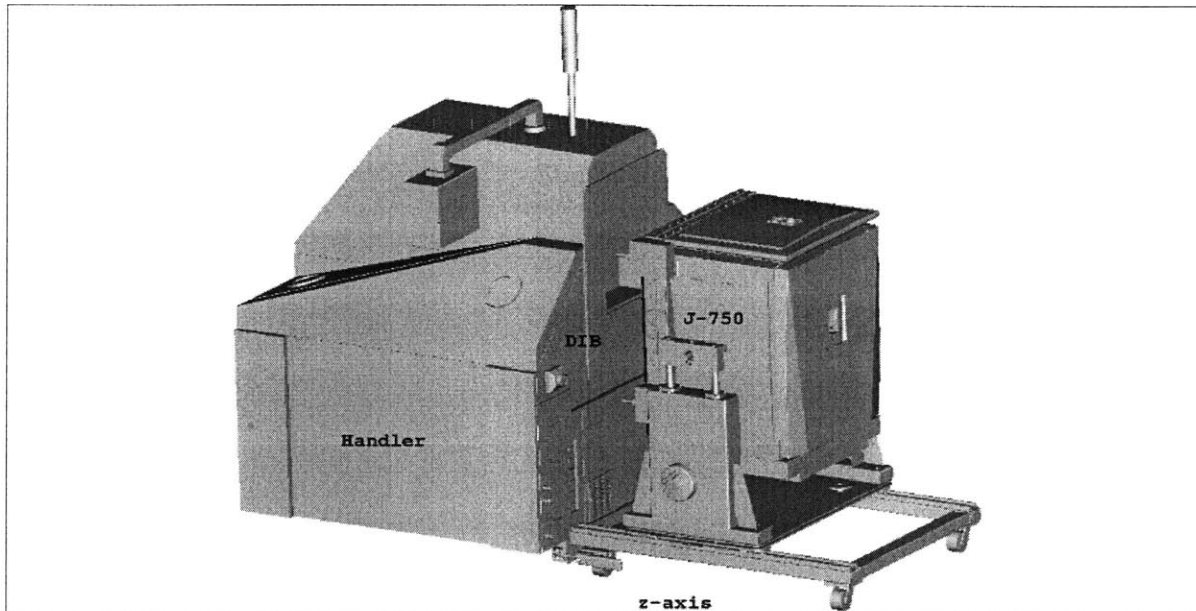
J-750/HANDLER CART ASSEMBLY
